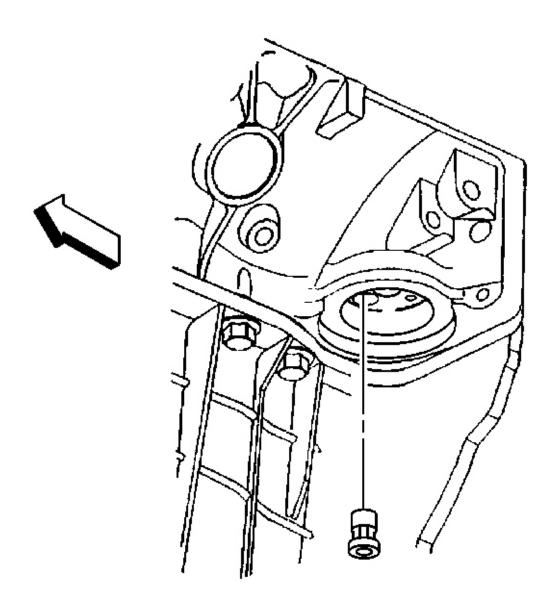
View Of Oil Filter Bypass Valve Courtesy of GENERAL MOTORS CORP.
